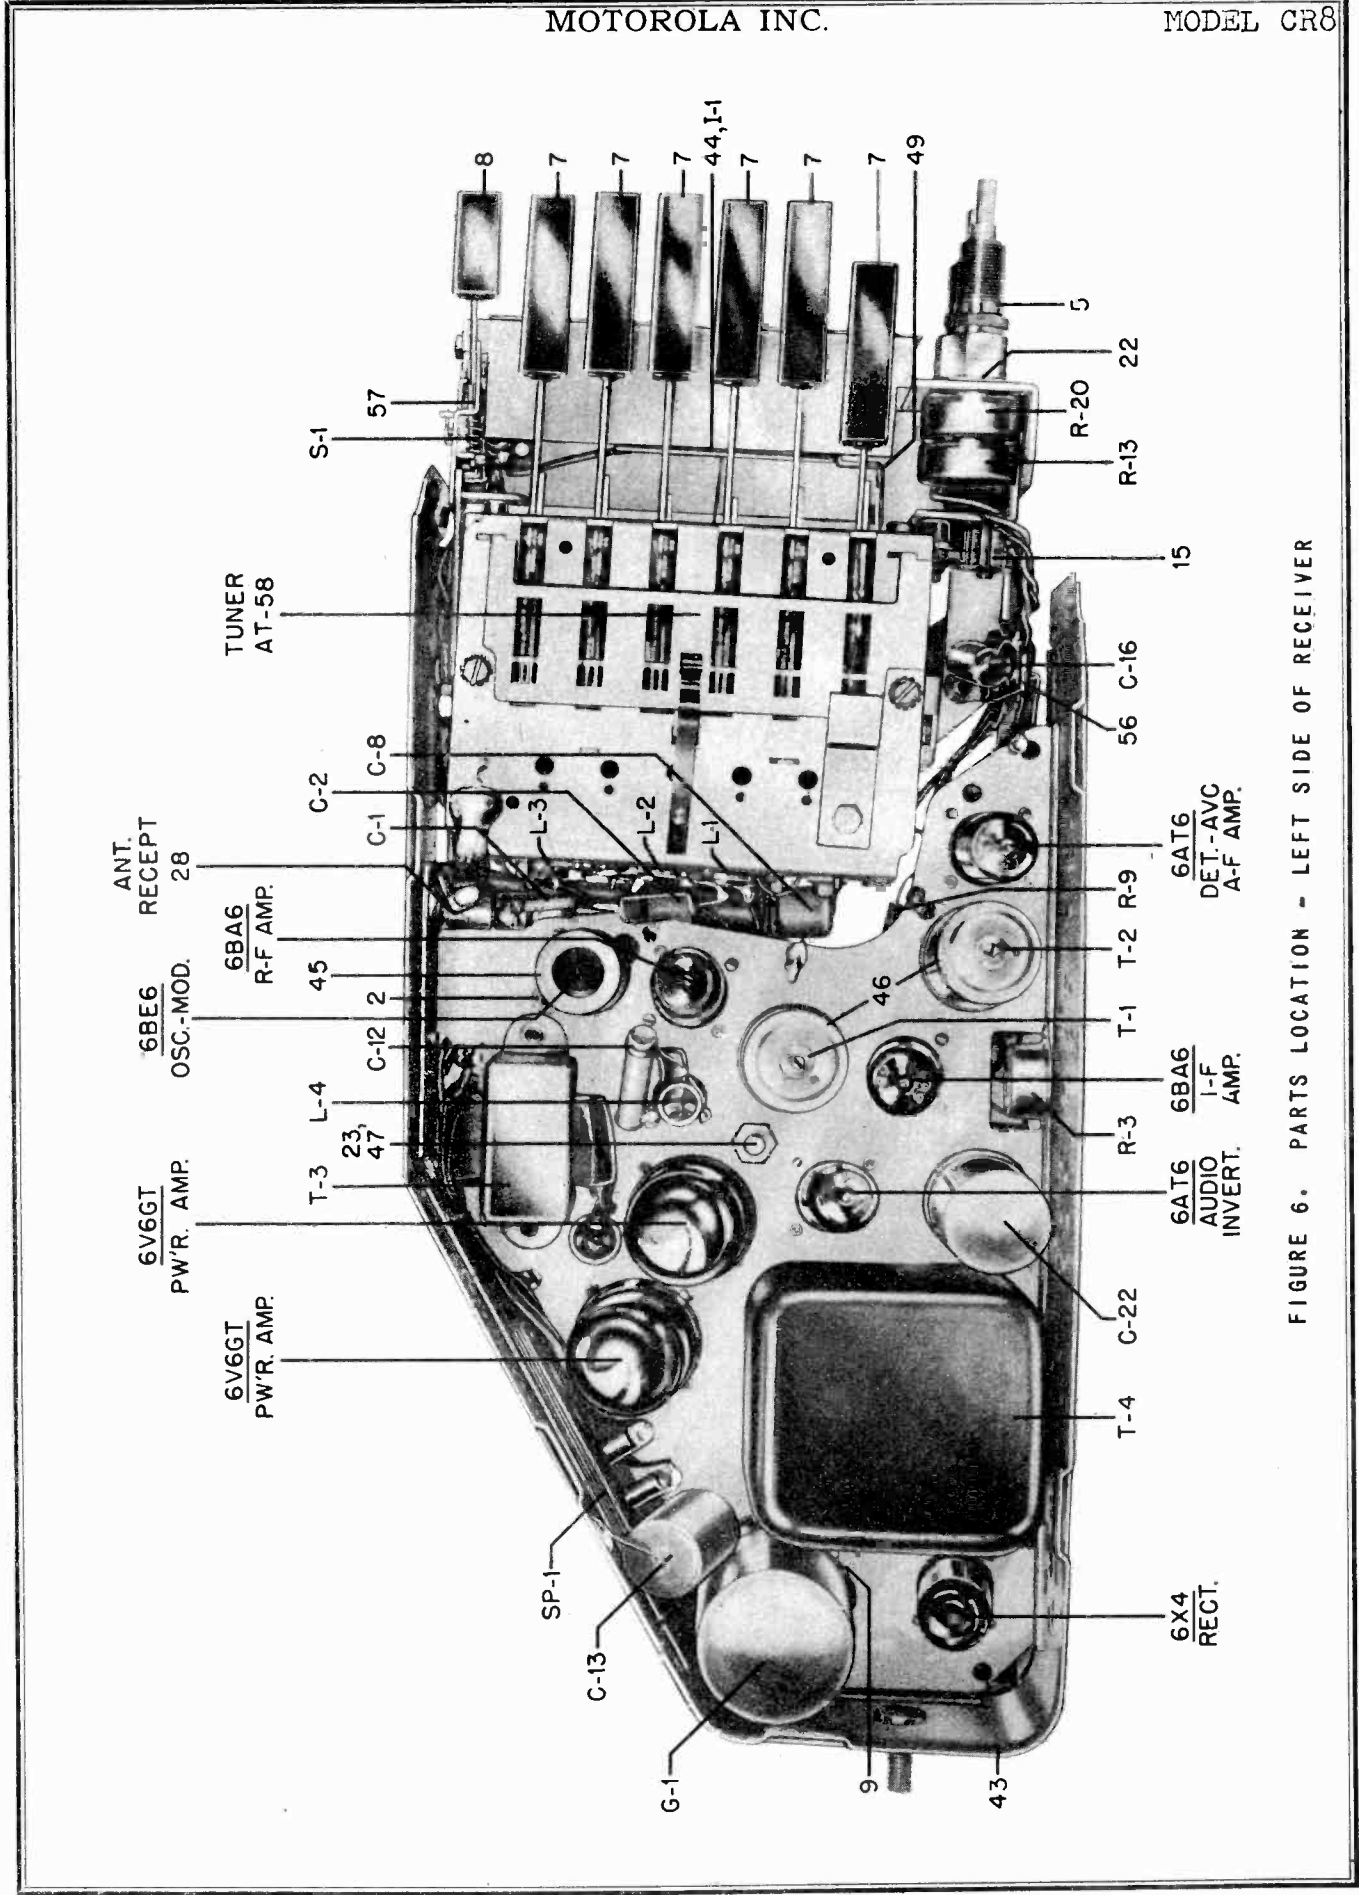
PARTS LOCATION - LEFT SIDE OF RECEIVER
